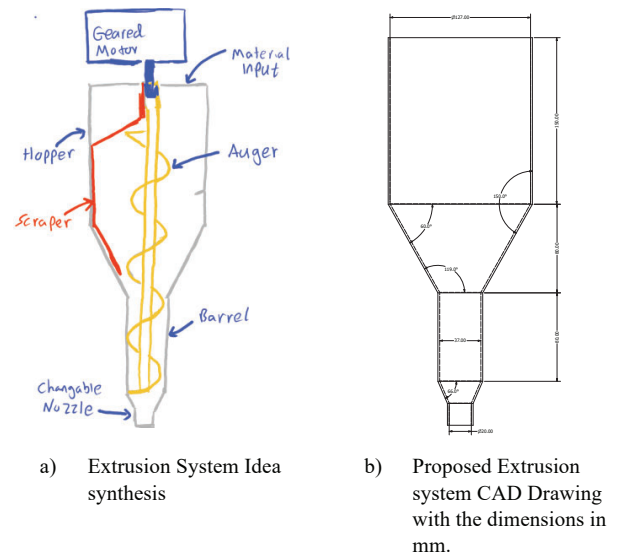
Proposed Extrusion System Idea Synthesis And CAD Drawing
